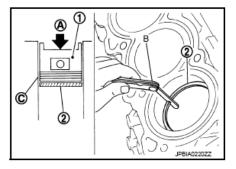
Checking Piston Ring End Gap Using Feeler Gauge Courtesy of NISSAN NORTH AMERICA, INC.
